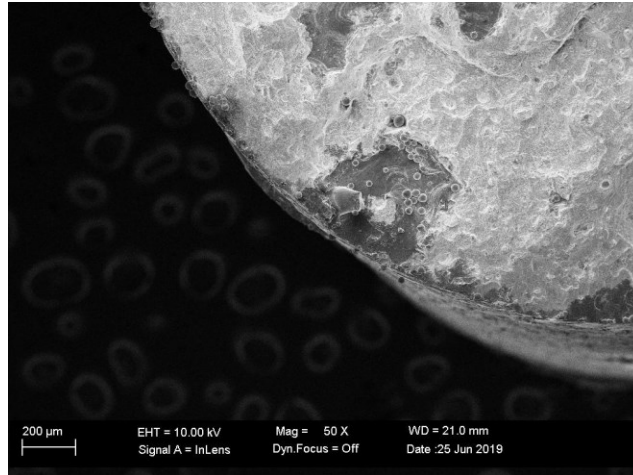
24 hour air cylinder #6 fracture surface zoomed to red circle
